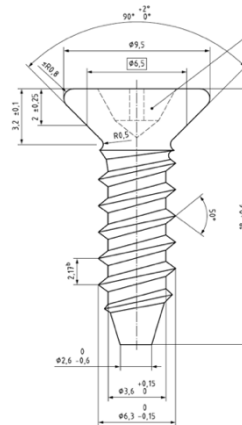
Dimension of thread, shank and head (Standardization, 2011).
